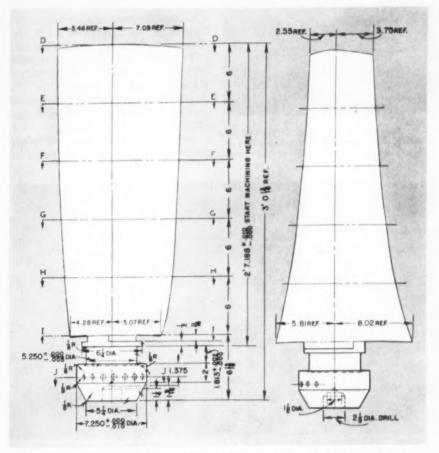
Drawing of AERODYNE fan blade, showing two shapes in which the fan blade is available. Curvature and balance of the fan blade are achieved through proper machining.
